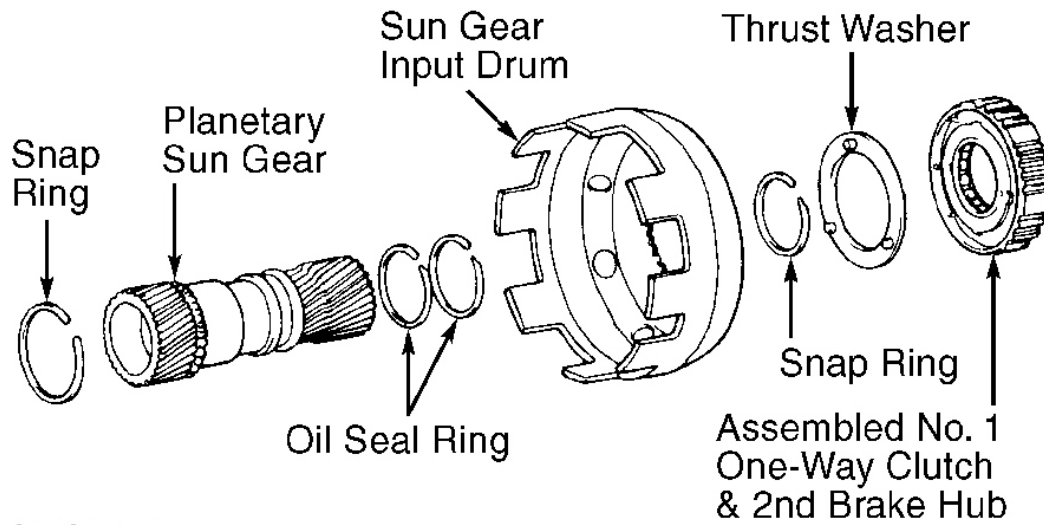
Installing & Checking No. 1 One-Way Clutch
